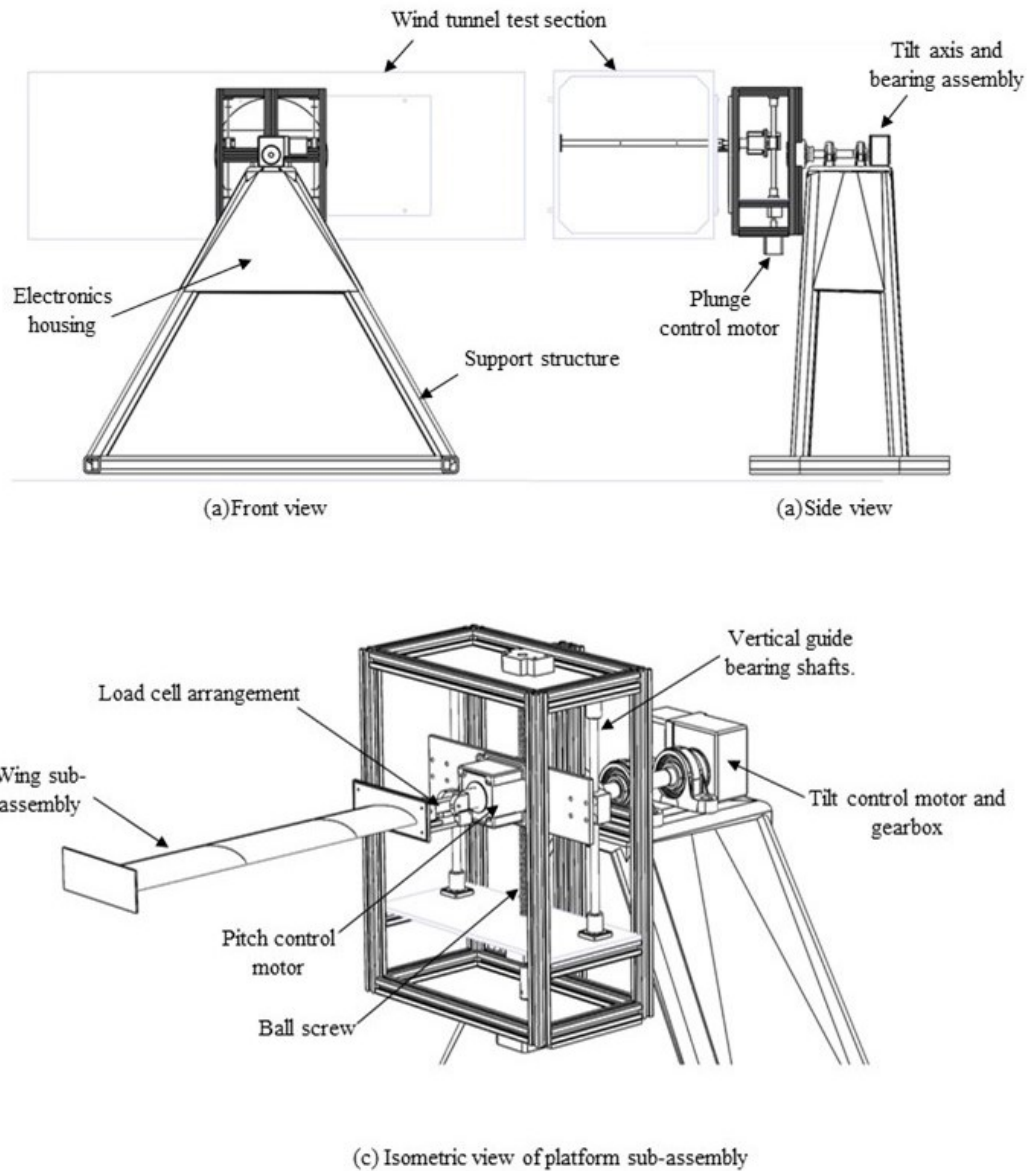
Experimental apparatus (a) Front view and (b) Side view of the apparatus, (c) Isometric view platform sub-assembly
